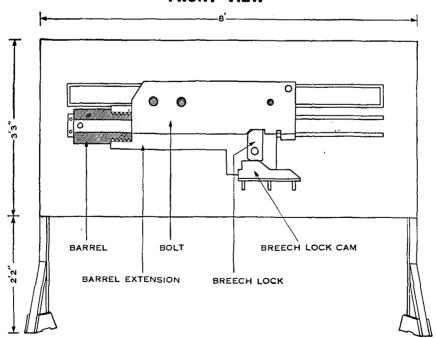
Wooden working model of recoiling parts to demonstrate headspace adjustment, locking and unlocking of the breech of Browning machine gun, caliber .30, M1917A1.
